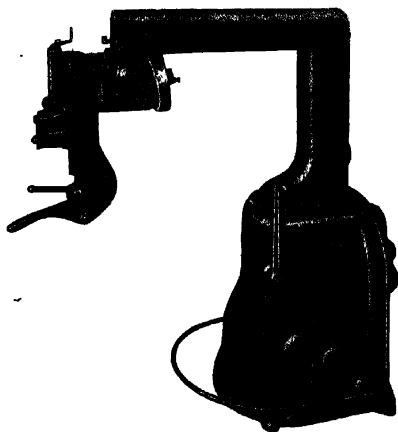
Deep-throat wiring and edging machine for internal circles (Oliver.)
